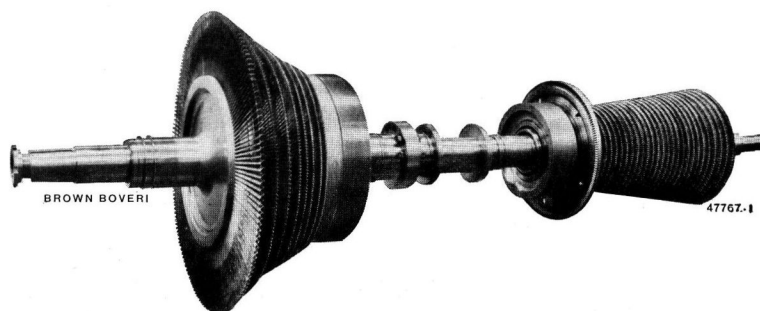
Rigidly coupled h. p. and l. p. rotors with their dummy piston.
